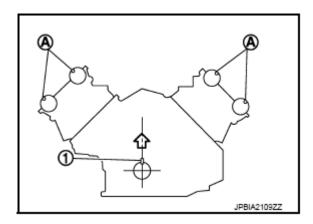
Identifying Crankshaft Key And Dowel Pin Positions Courtesy of NISSAN NORTH AMERICA, INC.
